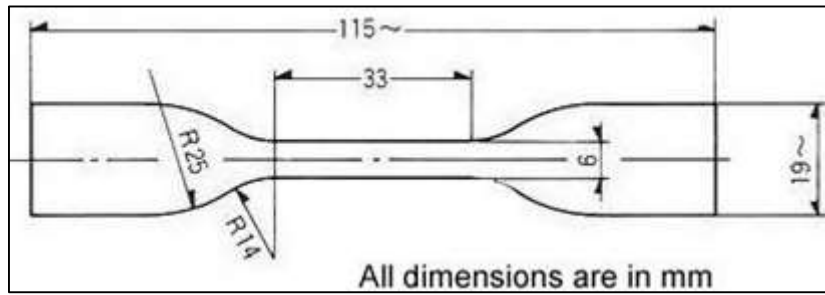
ASTM – D638 Type IV Tensile Test Specimen Details.
